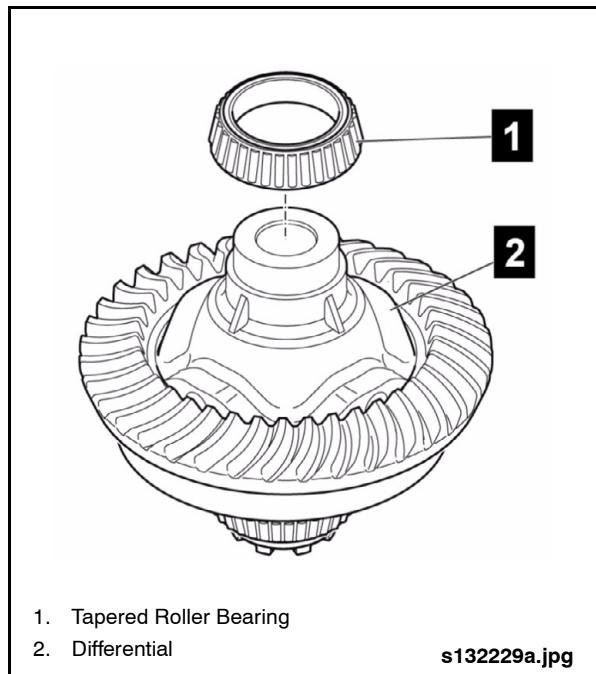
Installing Tapered Roller Bearing on Differential Side
